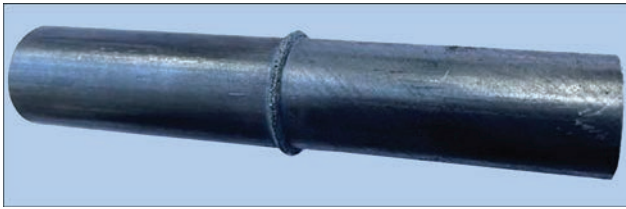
Welded joint of a pipe of Ø38×3 mm
